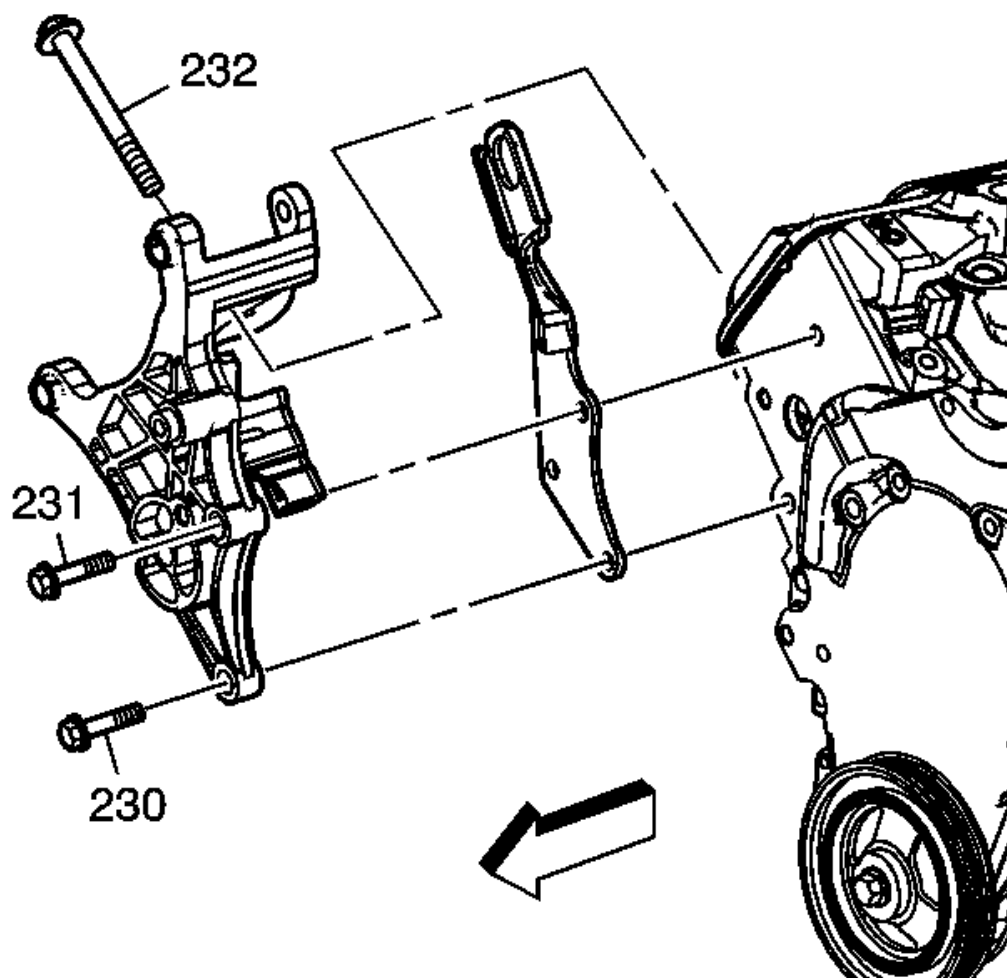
View Of Generator Bracket Assembly, Bolts & Front Engine Lift Hook
